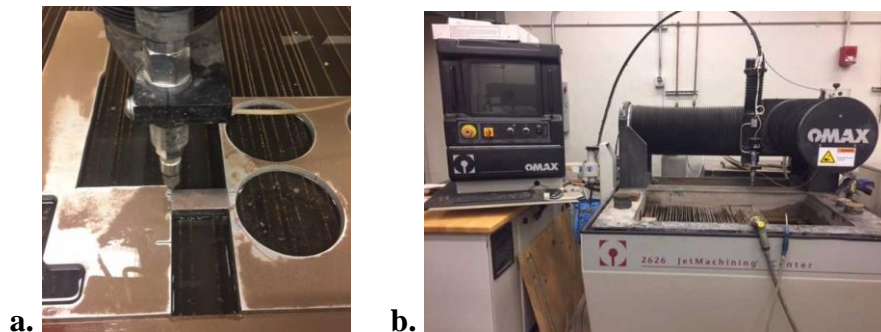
Example set up of water jet abrasive machining of a test specimen (a.) and OMAX 2626 water/abrasive machining center.
